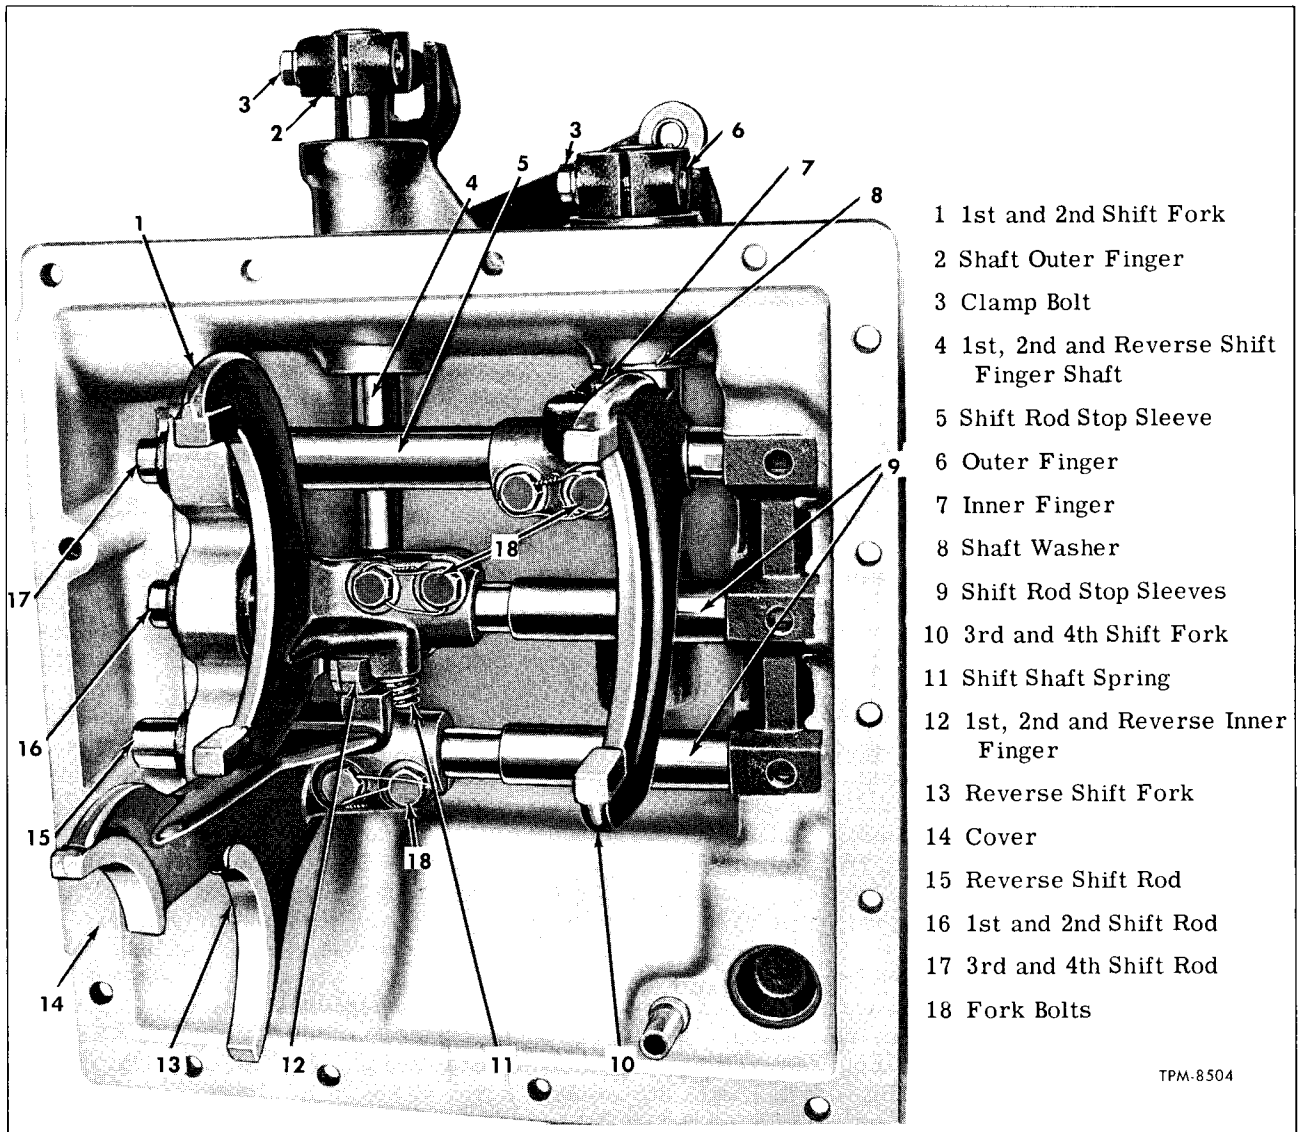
Transmission Cover With Forks and Shifting Mechanism
